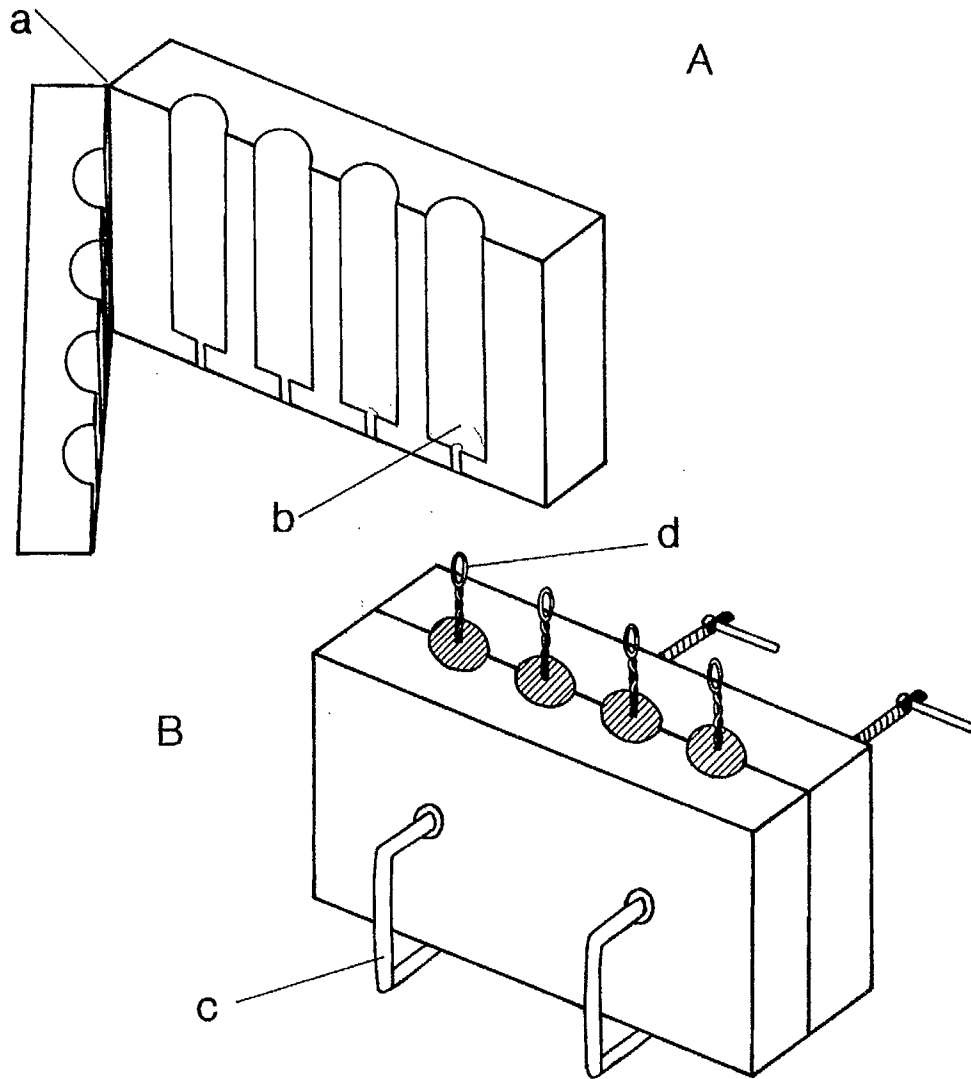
Mold construction and its use in casting gypsum cylinders. A - open mold; B - closed mold with gypsum cylinders drying. a - hinge, b - groove made by reaming two pieces of plastic wood clamed together, c - G clamp, d - plastic wire.
